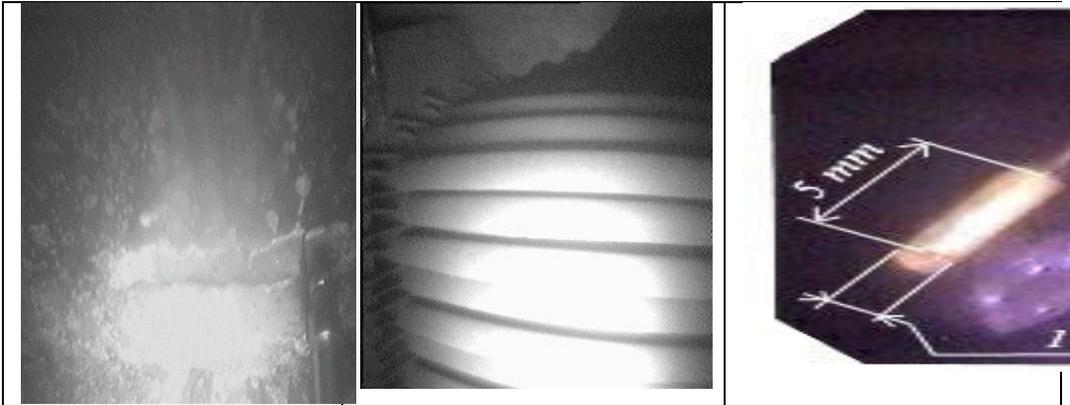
Visual testing and measurement inspection of vessel interior surfaces
